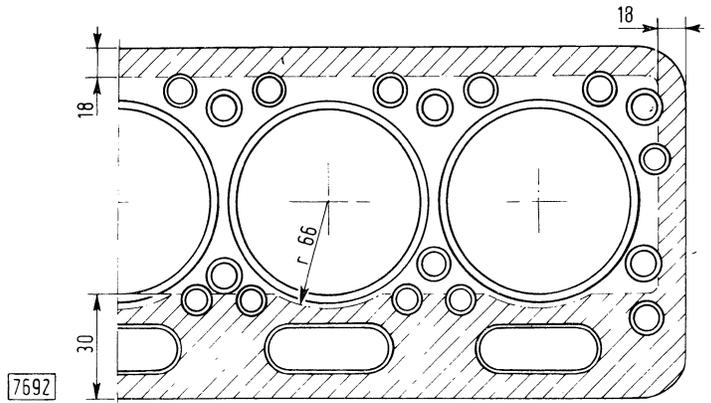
Cylinder Head Gasket Steel Face Area to be Coated with Jointing Compound Prior to Fitting (see text)
